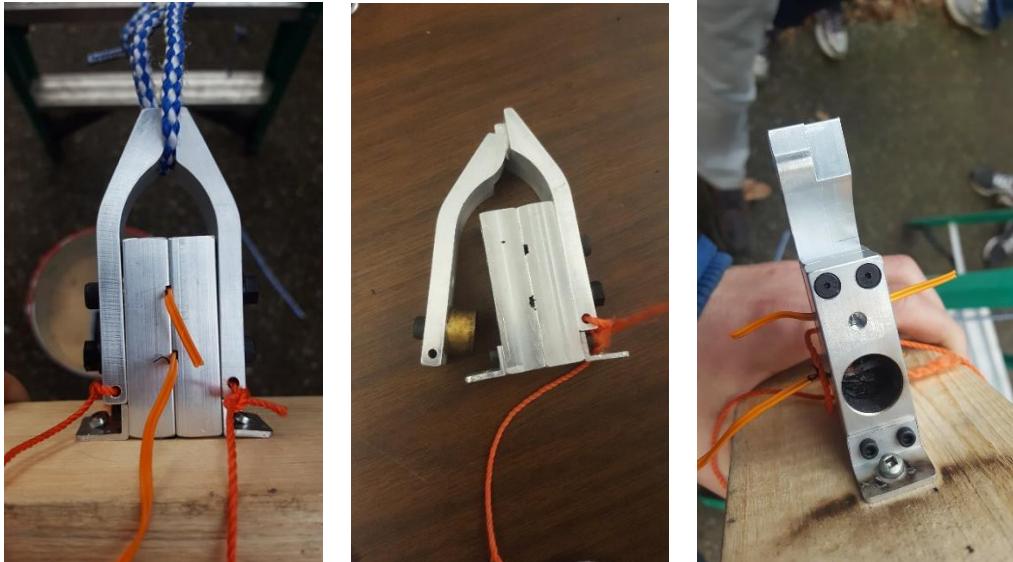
A parachute release system that I designed and machined. The goal of this design is to address the lack of redundancy in our older system. Each of the two hooks can be independently released by a didicated charge. Failure of one hook release mechanism
